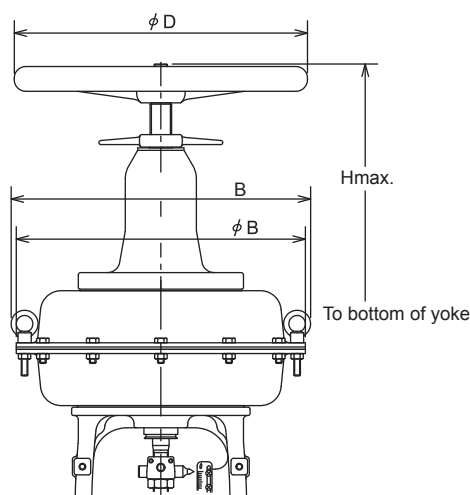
Dimensions of Multismotor with top-mounted hand wheel
